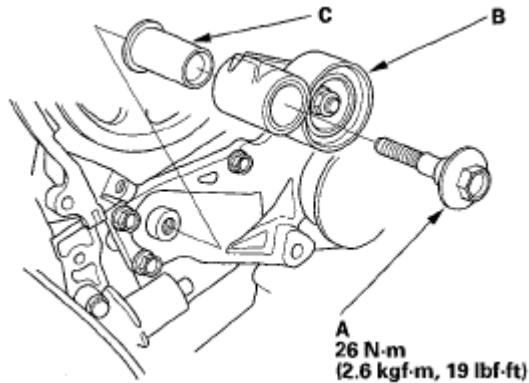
Identifying Timing Belt Adjuster Bolt With Torque Specifications
